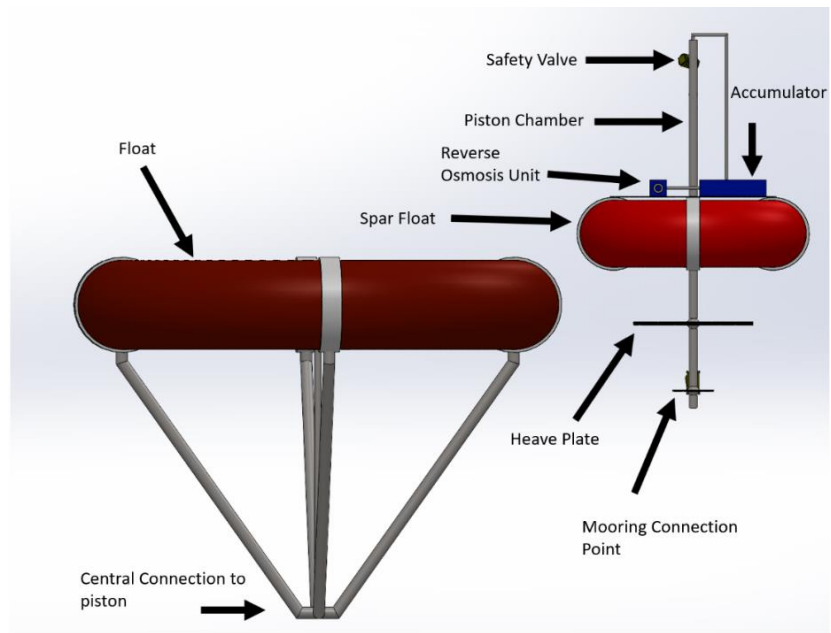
Exploded view of device as viewed in SolidWorks. Major components of buoy labelled.
